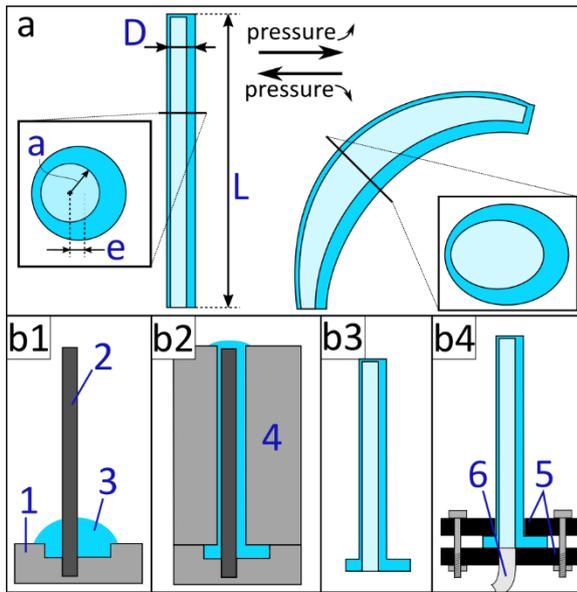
The working principle, including some key dimensions of a pneumatic actuator (a) and different steps in the fabrication process (b) of the proposed bending actuator with (1) the bottom half of the mold, (2) an eccentrically placed rod, (3) the liquid rubber poured into the mold, (4) the top half of the mold, (5) PMMA clamping plates and (6) pneumatic pressure supply tube.
